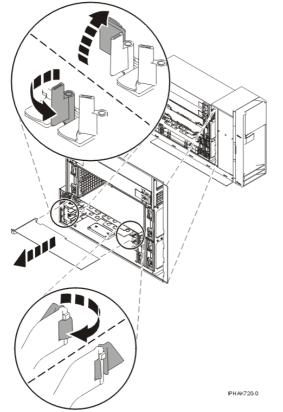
PCI adapter or filler plate removed from the rack-mounted system unit
